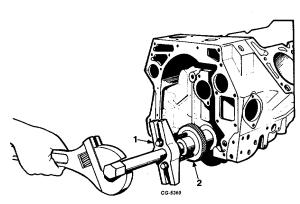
Using SE-1368 Puller to Remove Crankshaft Gear
